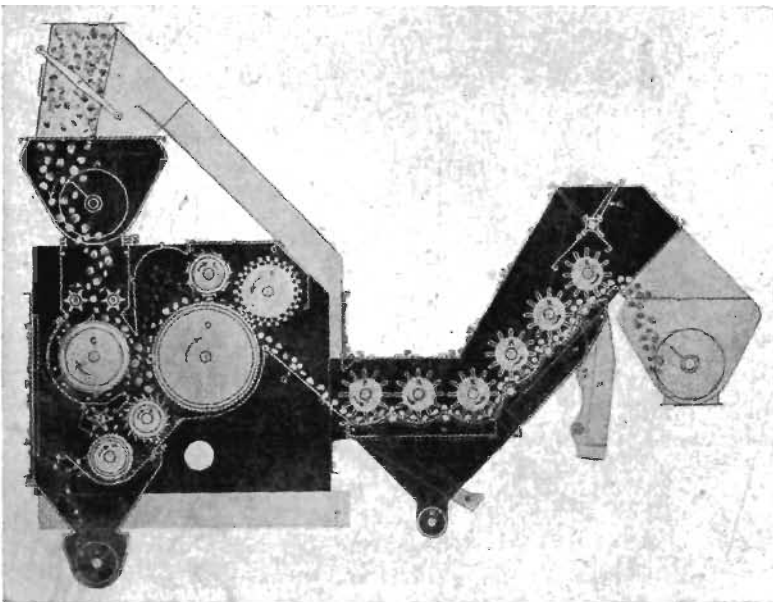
Cross-section of master-type hull extractor and cleaner.
